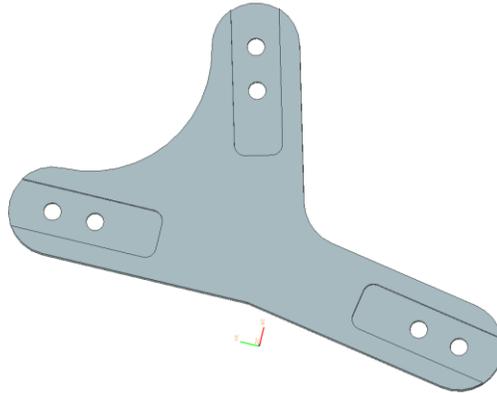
Second revision of a tube plug joint. Locating done by locating pins and bolts.
